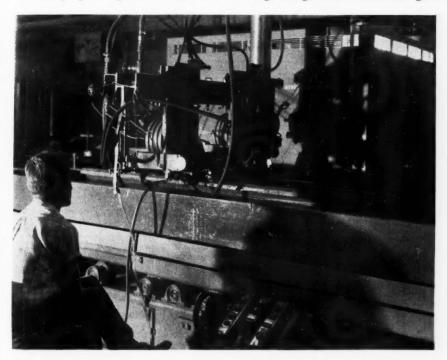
Hendey lathe bed mounted on special locating table of General Electric 50-K.W. high frequency induction heater.
